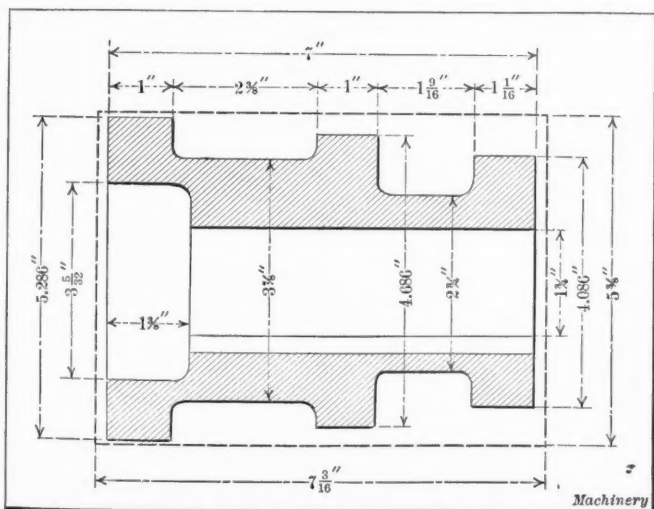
One of the Blanks bored and counterbored ready for the Lathe Operation
